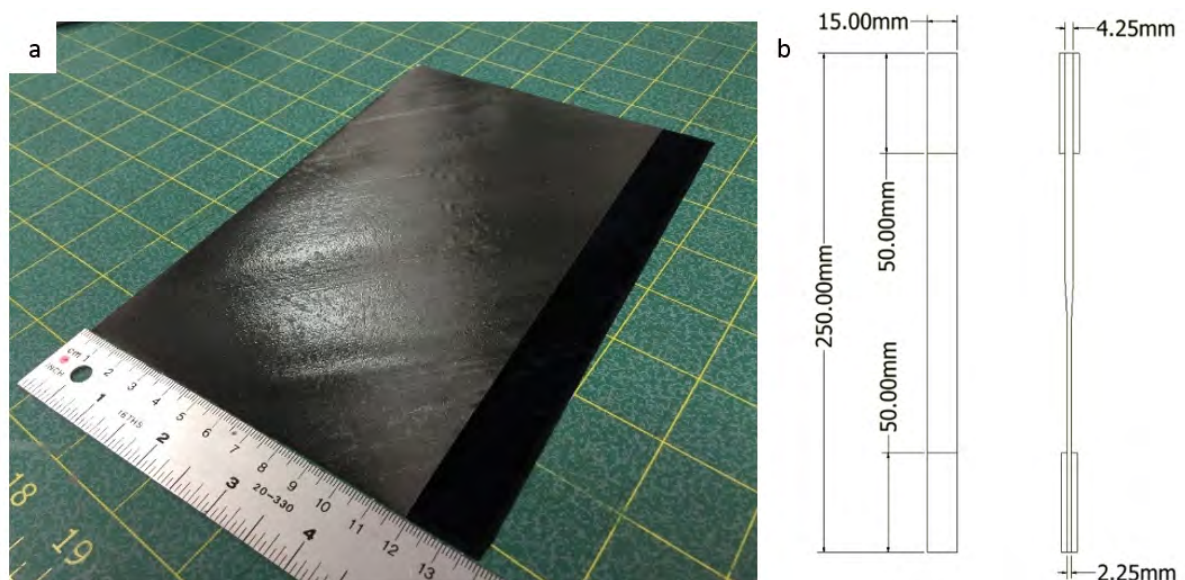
(a) Photograph of 'Ply 8' with nanotubes embedded into surface and (b) a schematic of the tapered specimen dimensions.
